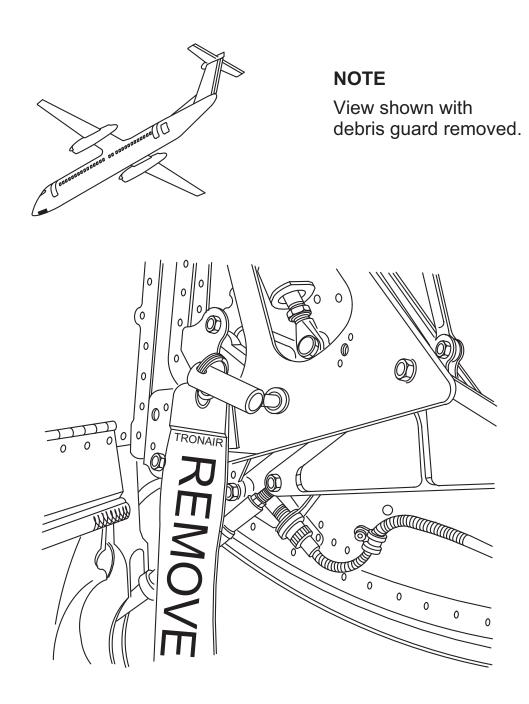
Nose Gear Hydraulic Door Lock Pin
